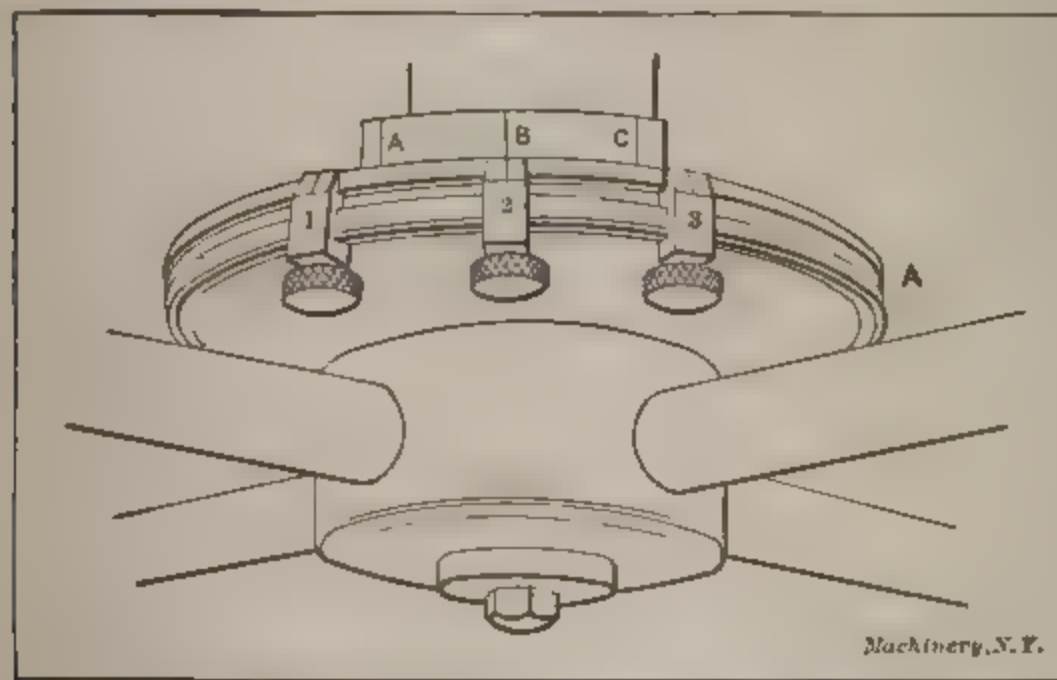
Enlarged Detail of the Indicator of the Device shown in Fig. 13
